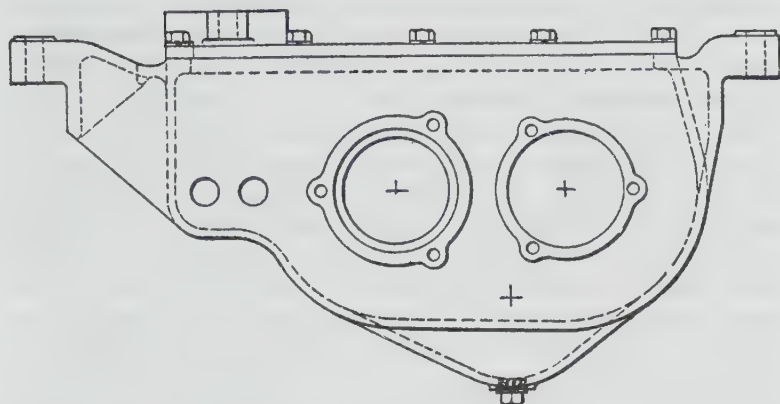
ONE-PIECE GEAR CASE WITH GEAR SHAFTS IN HORIZONTAL PLANE.
